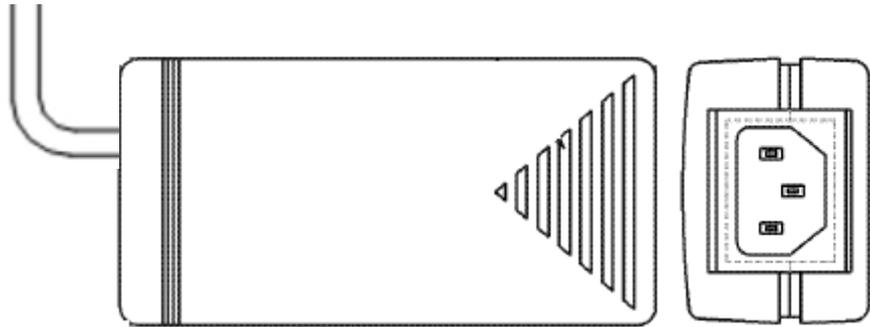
Top View (Left) and Side View (Right) of the AC Adaptor
